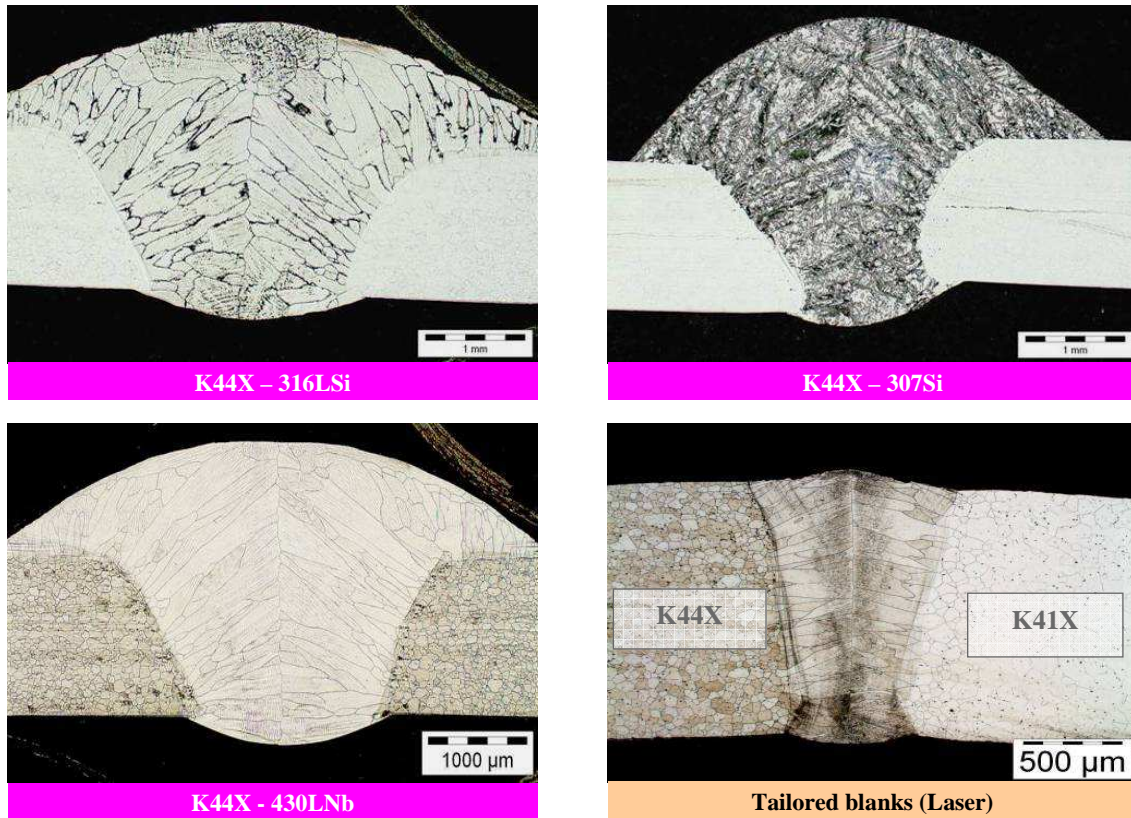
Initial microstructure of the weld seams – K44X MAG welding and Laser welding.
